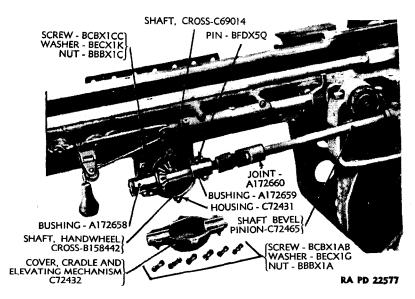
Cradle and Elevating Mechanism Housing and Cover
